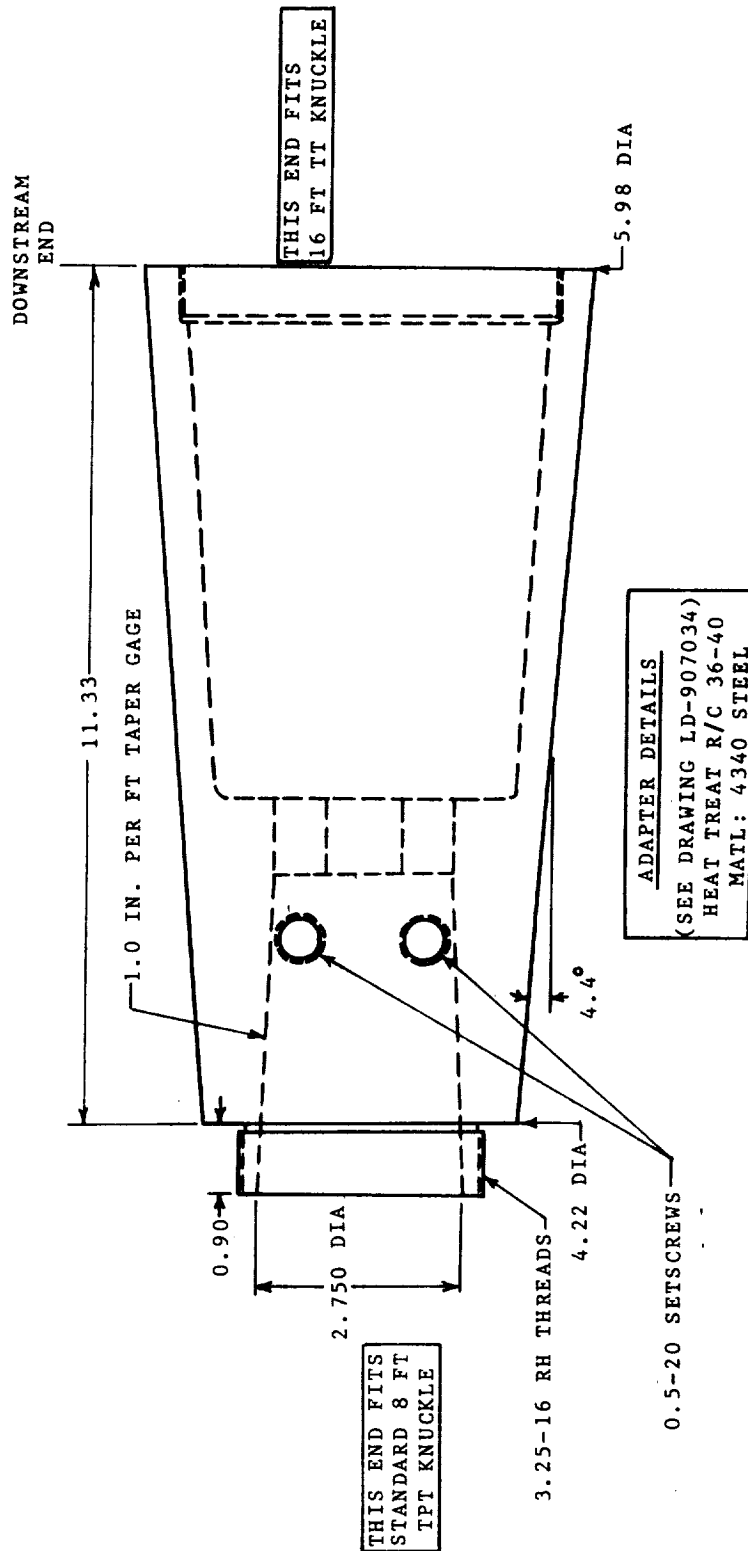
Sketch of adapter LD-907034. (All dimensions are in inches unless otherwise indicated.)
